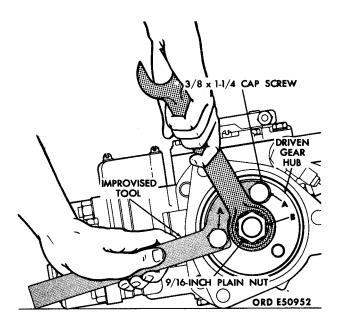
REMOVING OR INSTALLING PLAIN NUT FROM FUEL INJECTION PUMP ADVANCE UNIT SHAFT.
